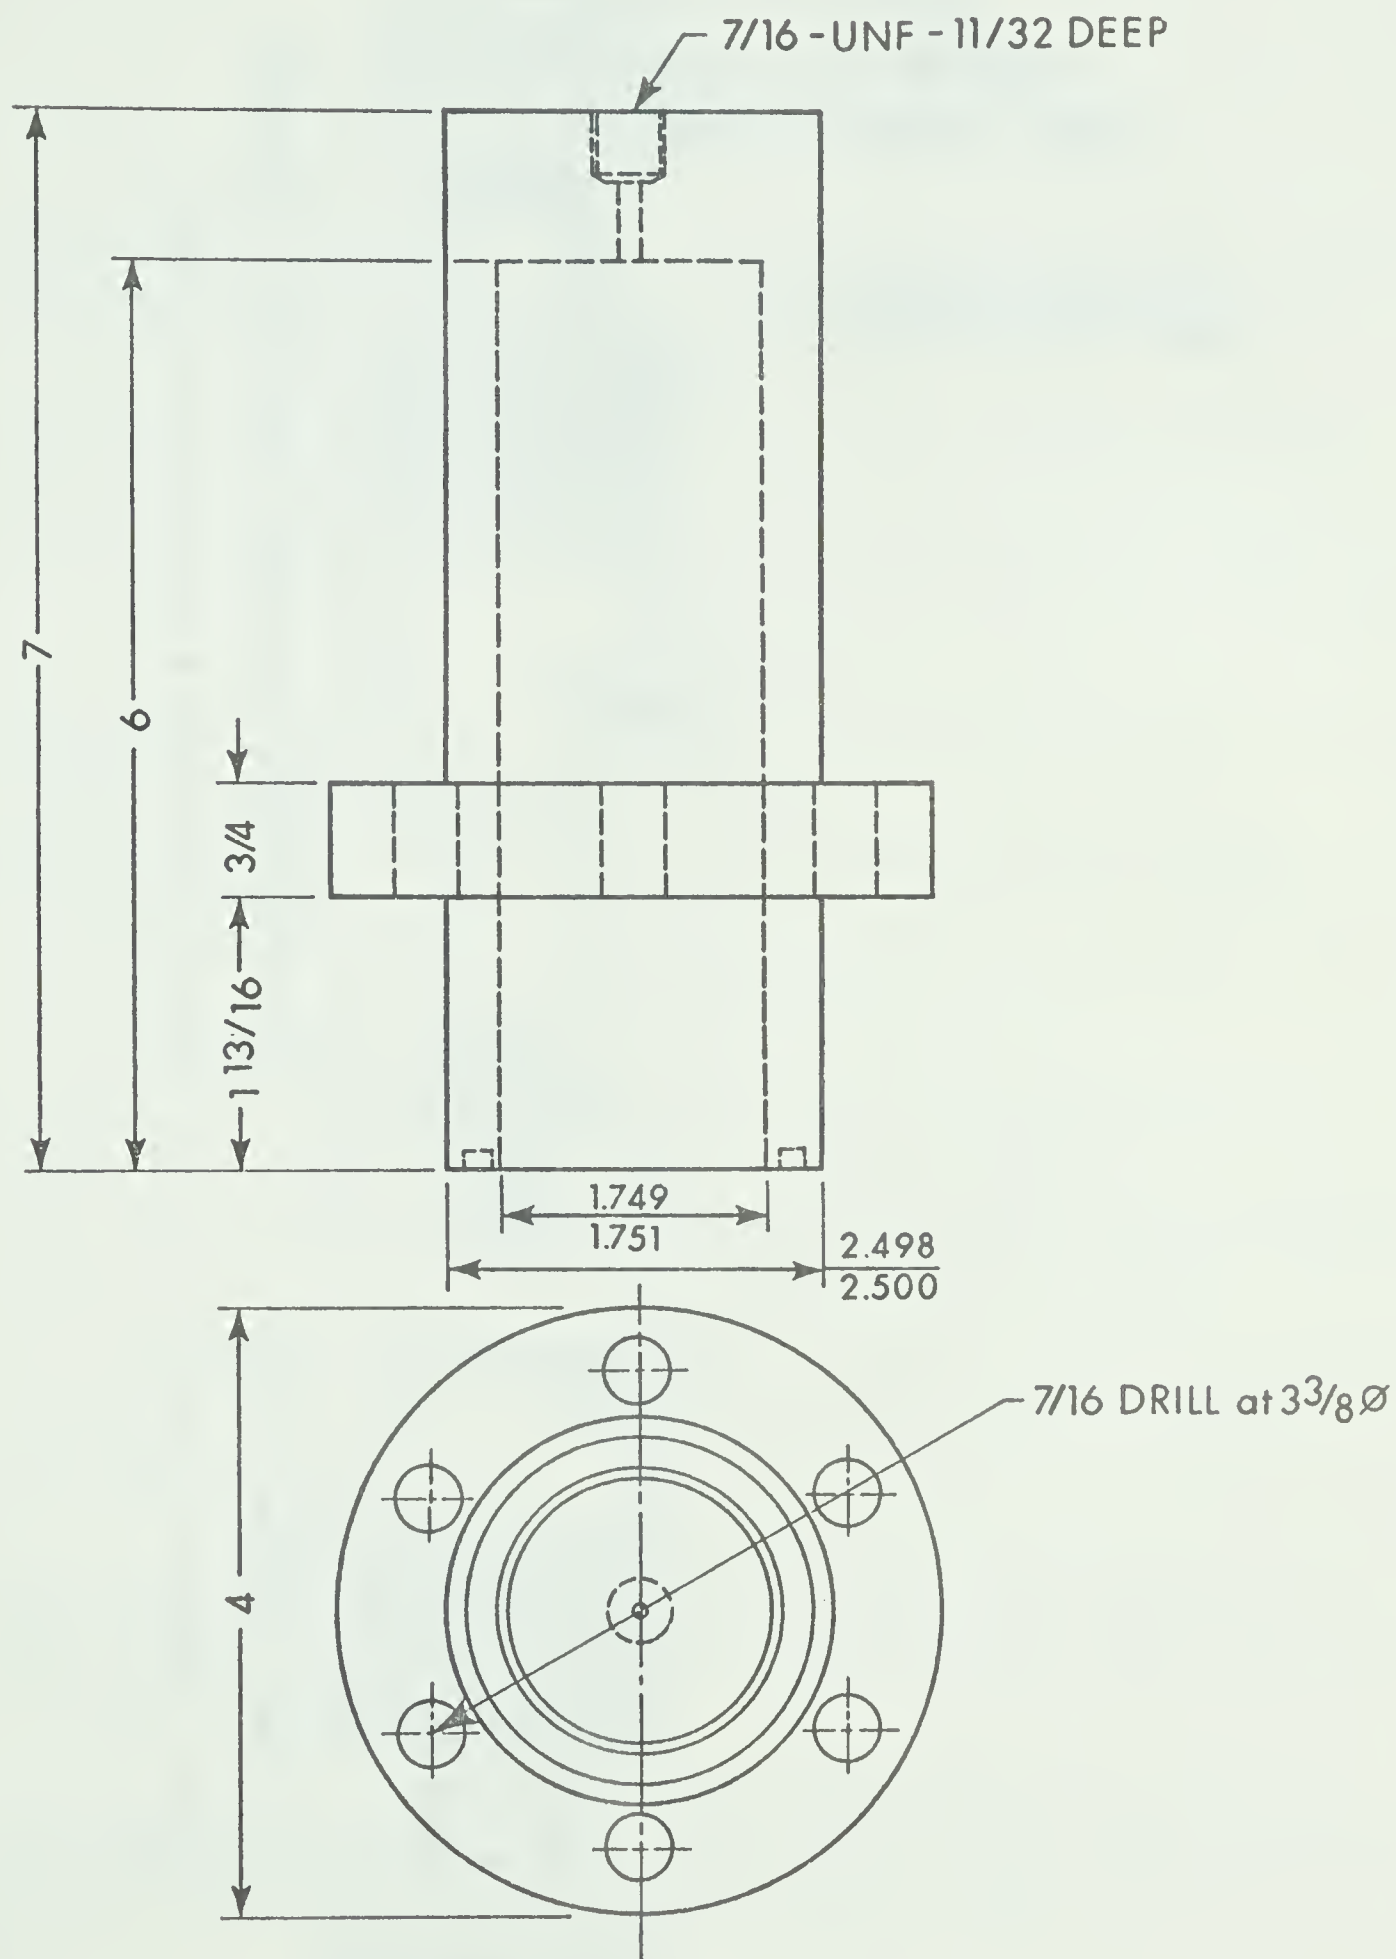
DIMENSIONS OF THE END CYLINDERS
